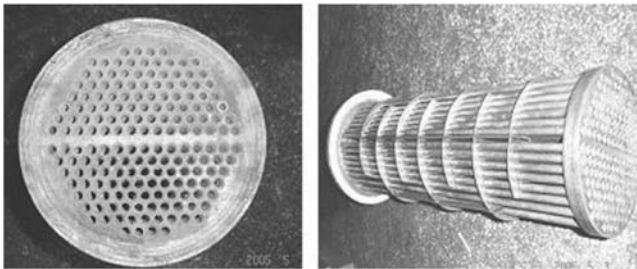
Tube bundle of the STHX with segmental baffles (for SM): (a) end view and (b) side view
